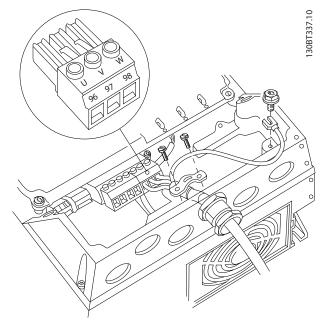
Motor Connection for Enclosure Type A4/A5 (IP55/66/NEMA Type 12)
